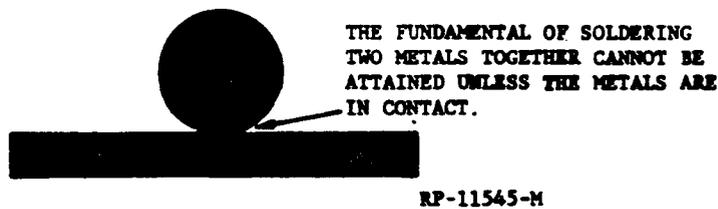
CROSS SECTION OF POSITION OF CONNECTED WIRE ON TERMINAL (PAR 6.3.1)
